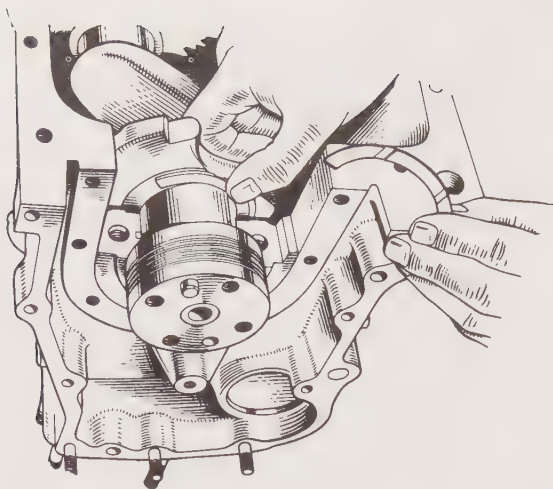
35 Fitting thrust washers to rear main bearing journal.
